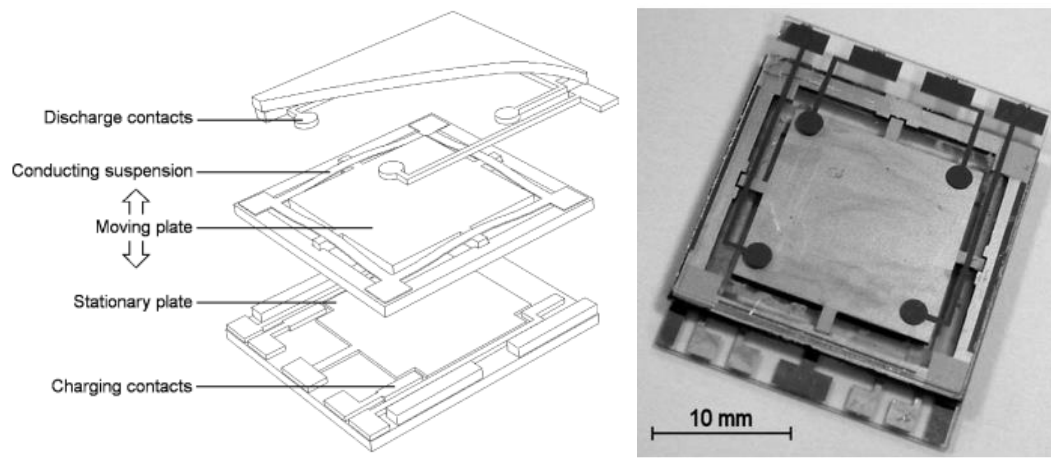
Exploded view(left) and prototype(right) of power generator [70]
